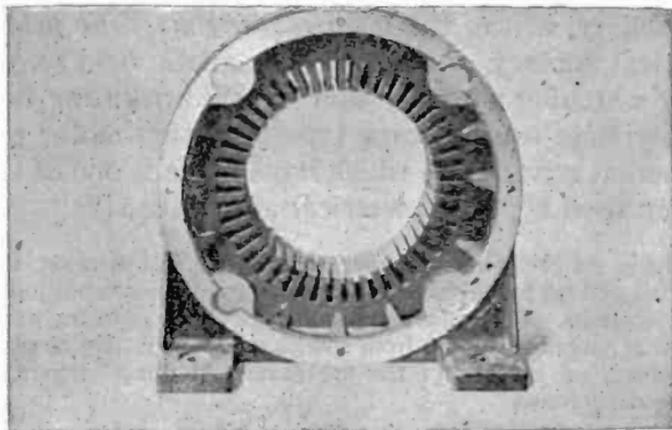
,527.—*Reliance induction motor construction 2.* Field laminations assembled with end flanges and ready for winding. End flanges are cast steel. The feet are cast integral with the steel flanges. All machine work on the flanges is done after assembly with the laminations.
